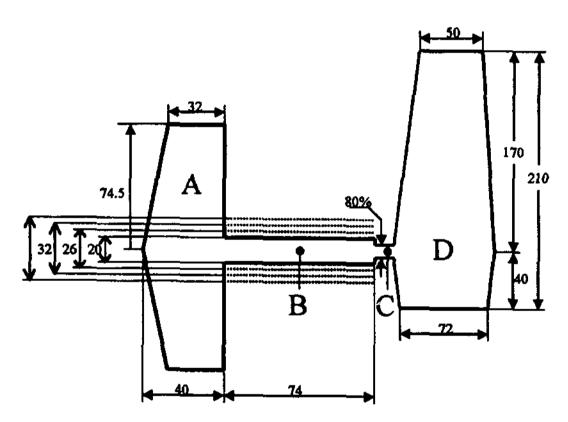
Dimensions(unit: mm) of four T-shaped castings.
